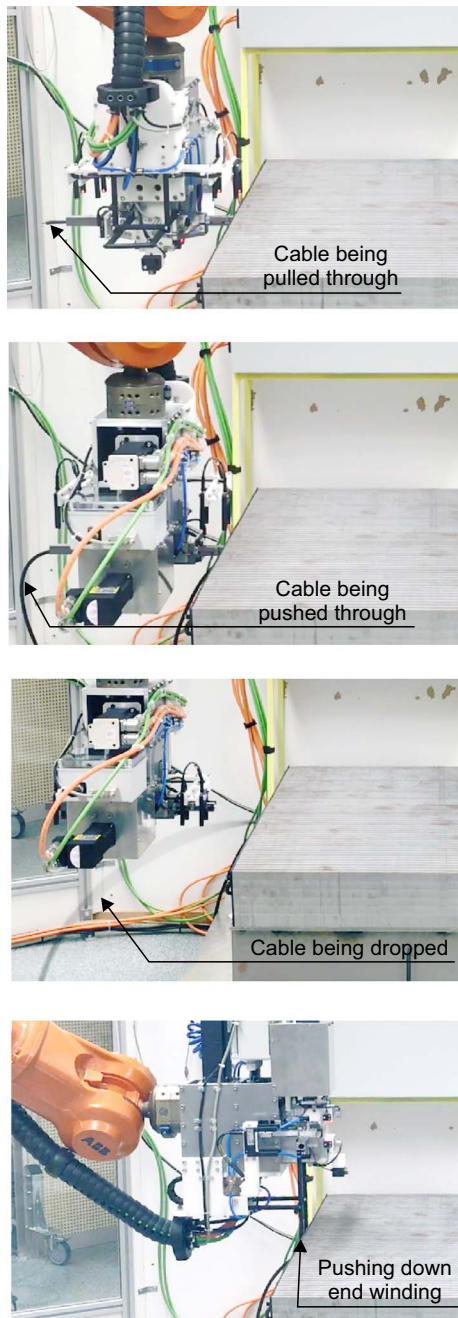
(a) A robot cable feeder tool pulling cable through the stator section during robotized stator cable winding experiments. (b) A robot cable feeder tool pushing cable through the stator section during robotized stator cable winding experiments. (c) A robot cable feeder tool dropping a cable during robotized stator cable winding experiments. (d) A robot cable feeder tool pushing down the end windings during robotized stator cable winding experiments.
